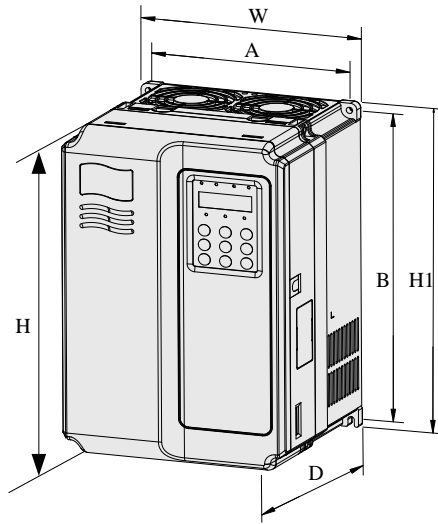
Physical appearance and overall dimensions of the MD380 (0.4kW~15kW plastic housing)
